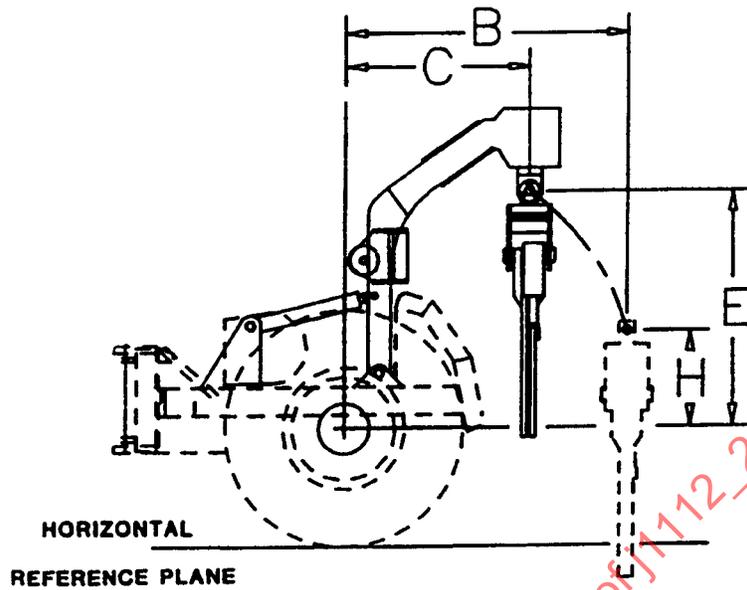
SINGLE FUNCTION BOOM ASSEMBLY
